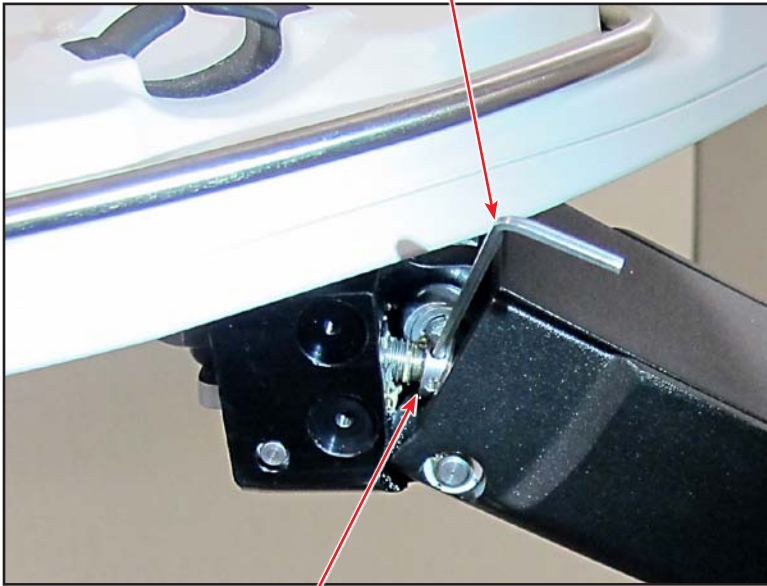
Washers and Bearings used to attach Tray Assembly to the Tray Arm
